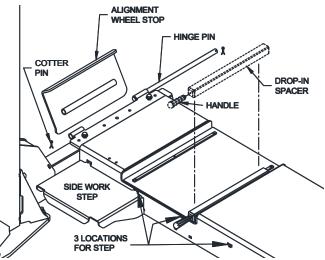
Alignment Wheel Stop & Turn Plate Installation
